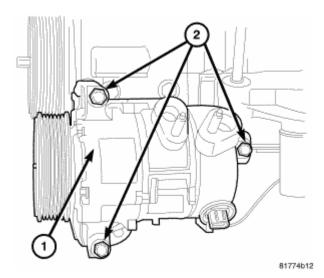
Removing/Installing A/C Compressor Courtesy of CHRYSLER LLC
